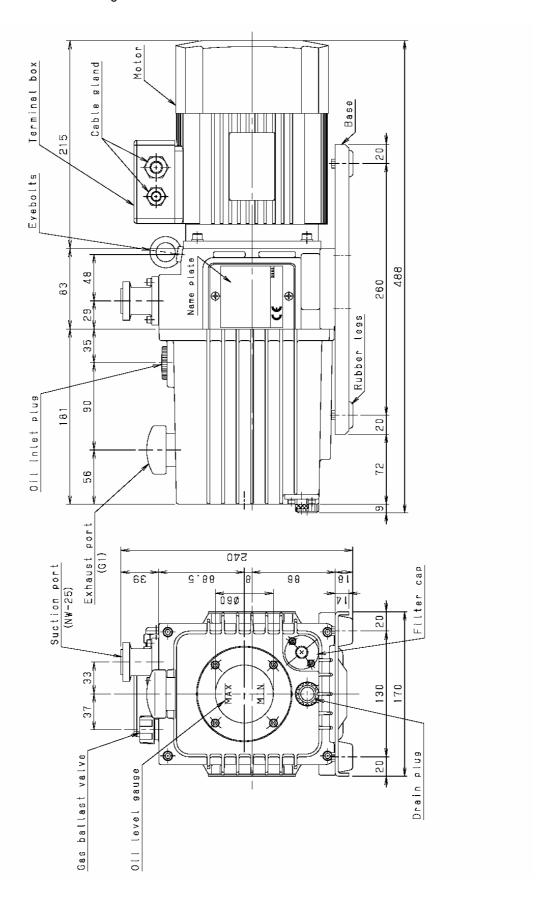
Dimensional drawing of GLD-136A oil sealed rotary vacuum pump
